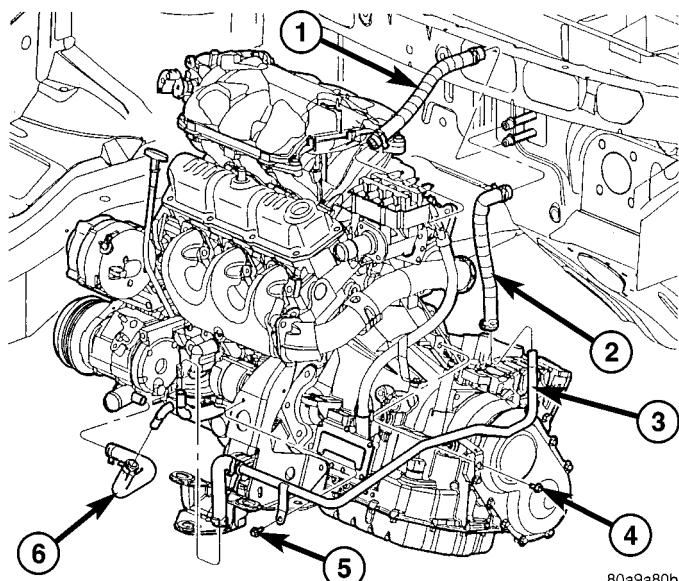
HEATER HOSES 3.3/3.8L (With Engine Oil Cooler)
